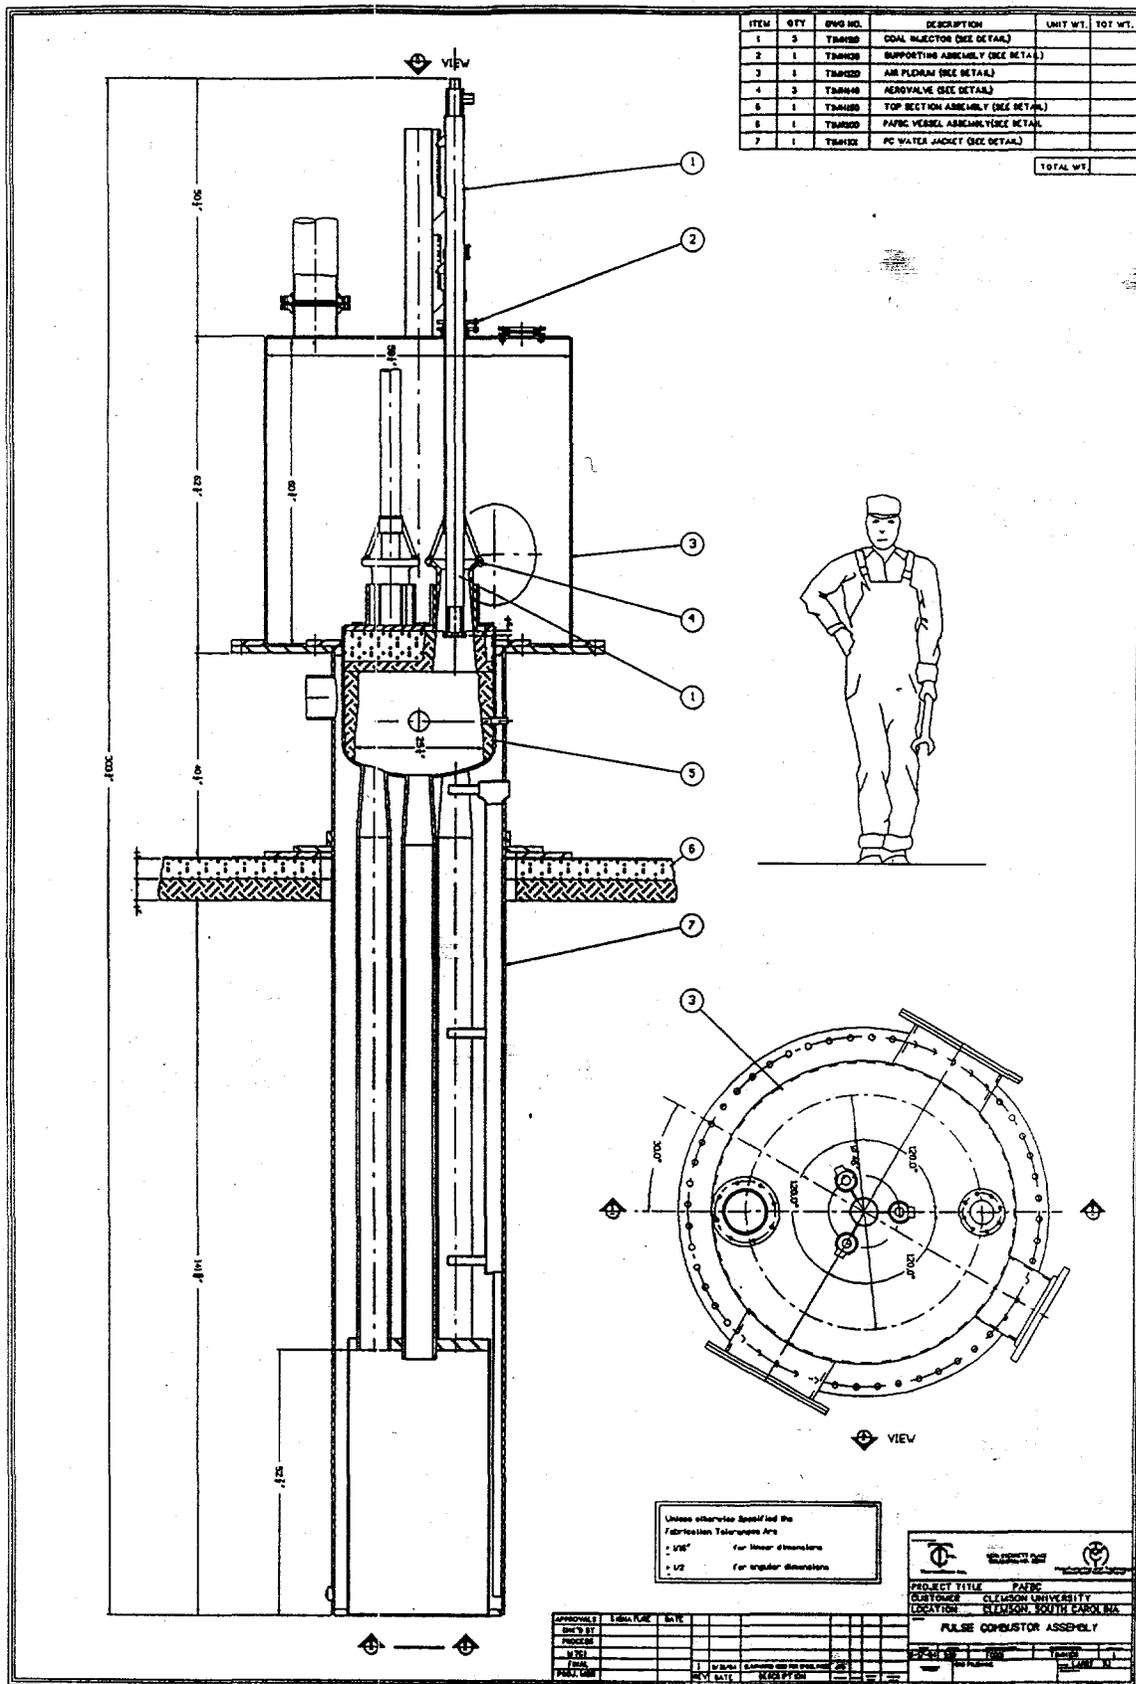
PULSE COMBUSTOR ASSEMBLY
